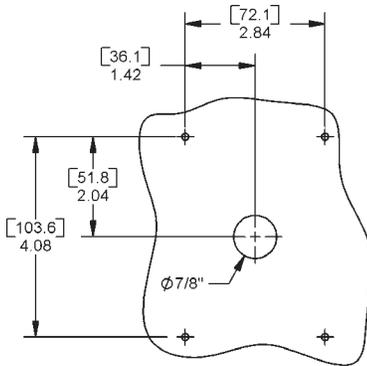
A: BAPI-Box BB Enclosure Mounting Holes Rotate 90° for Horizontal Mounting
